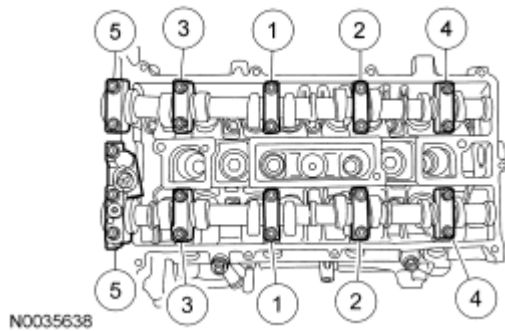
Identifying Tightening Sequence Of Camshaft Bearing Cap Bolts
